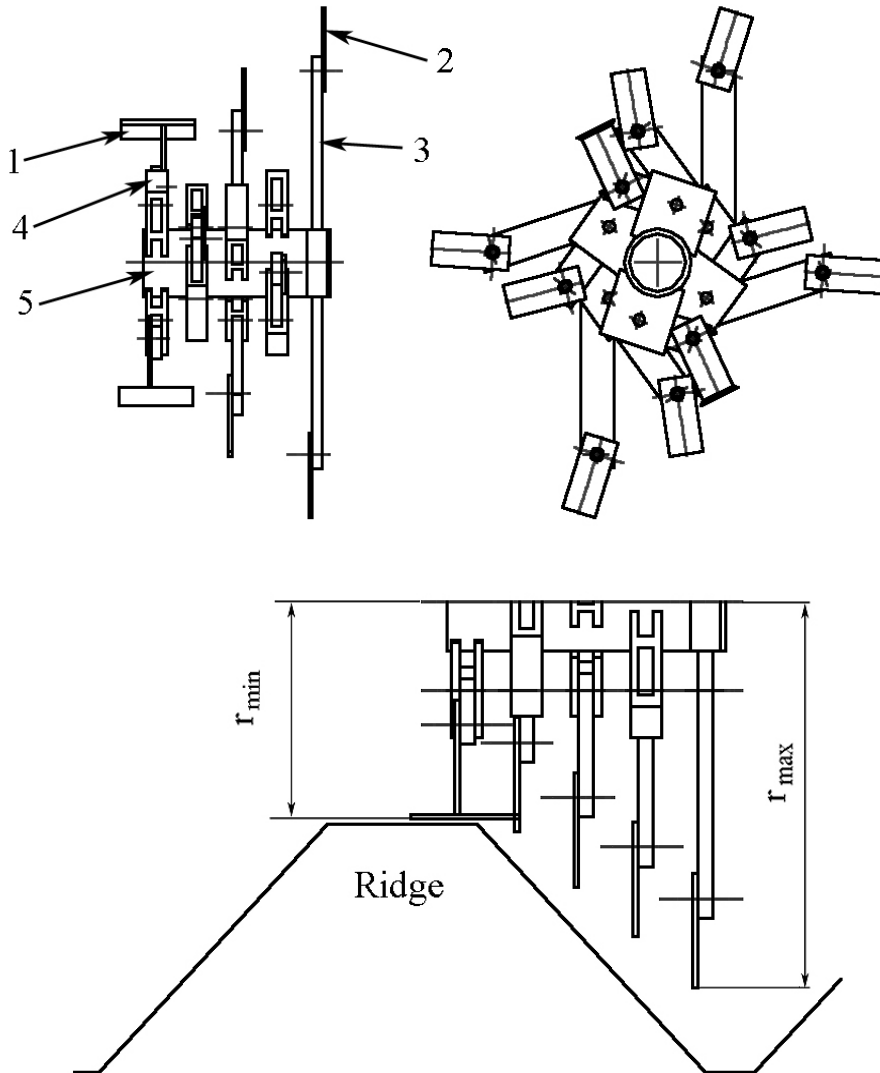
Rotor of flail mower (1, inner knife; 2, straight knife; 3, knife arm; 4, arm holder; 5, main shaft)
